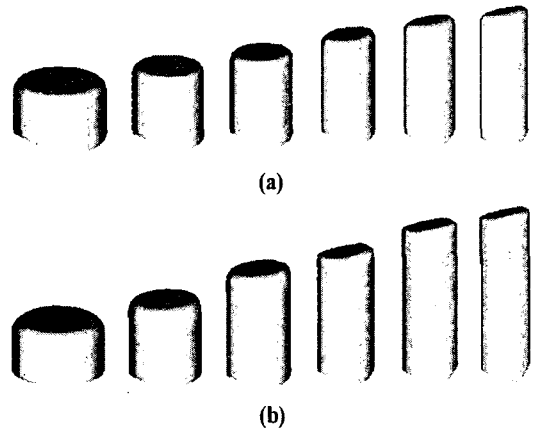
Intermediate punch shapes in each forming stage: (a) initial design; (b) modified design
